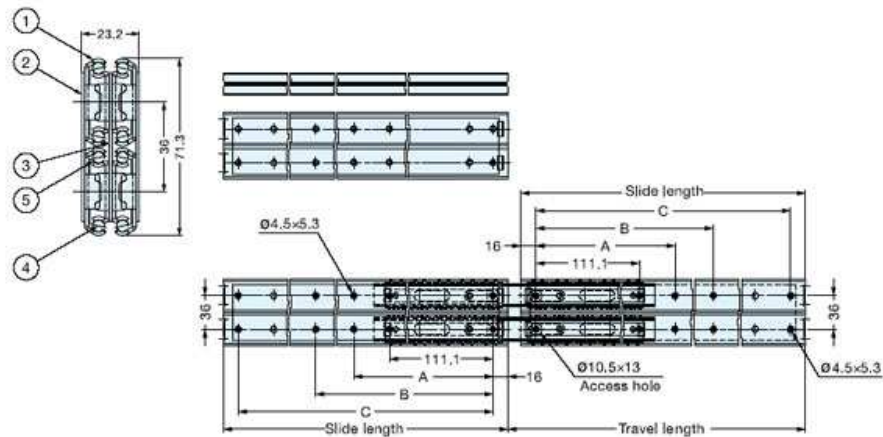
Linear Bearing Slider Dimensions (mm) [4].
